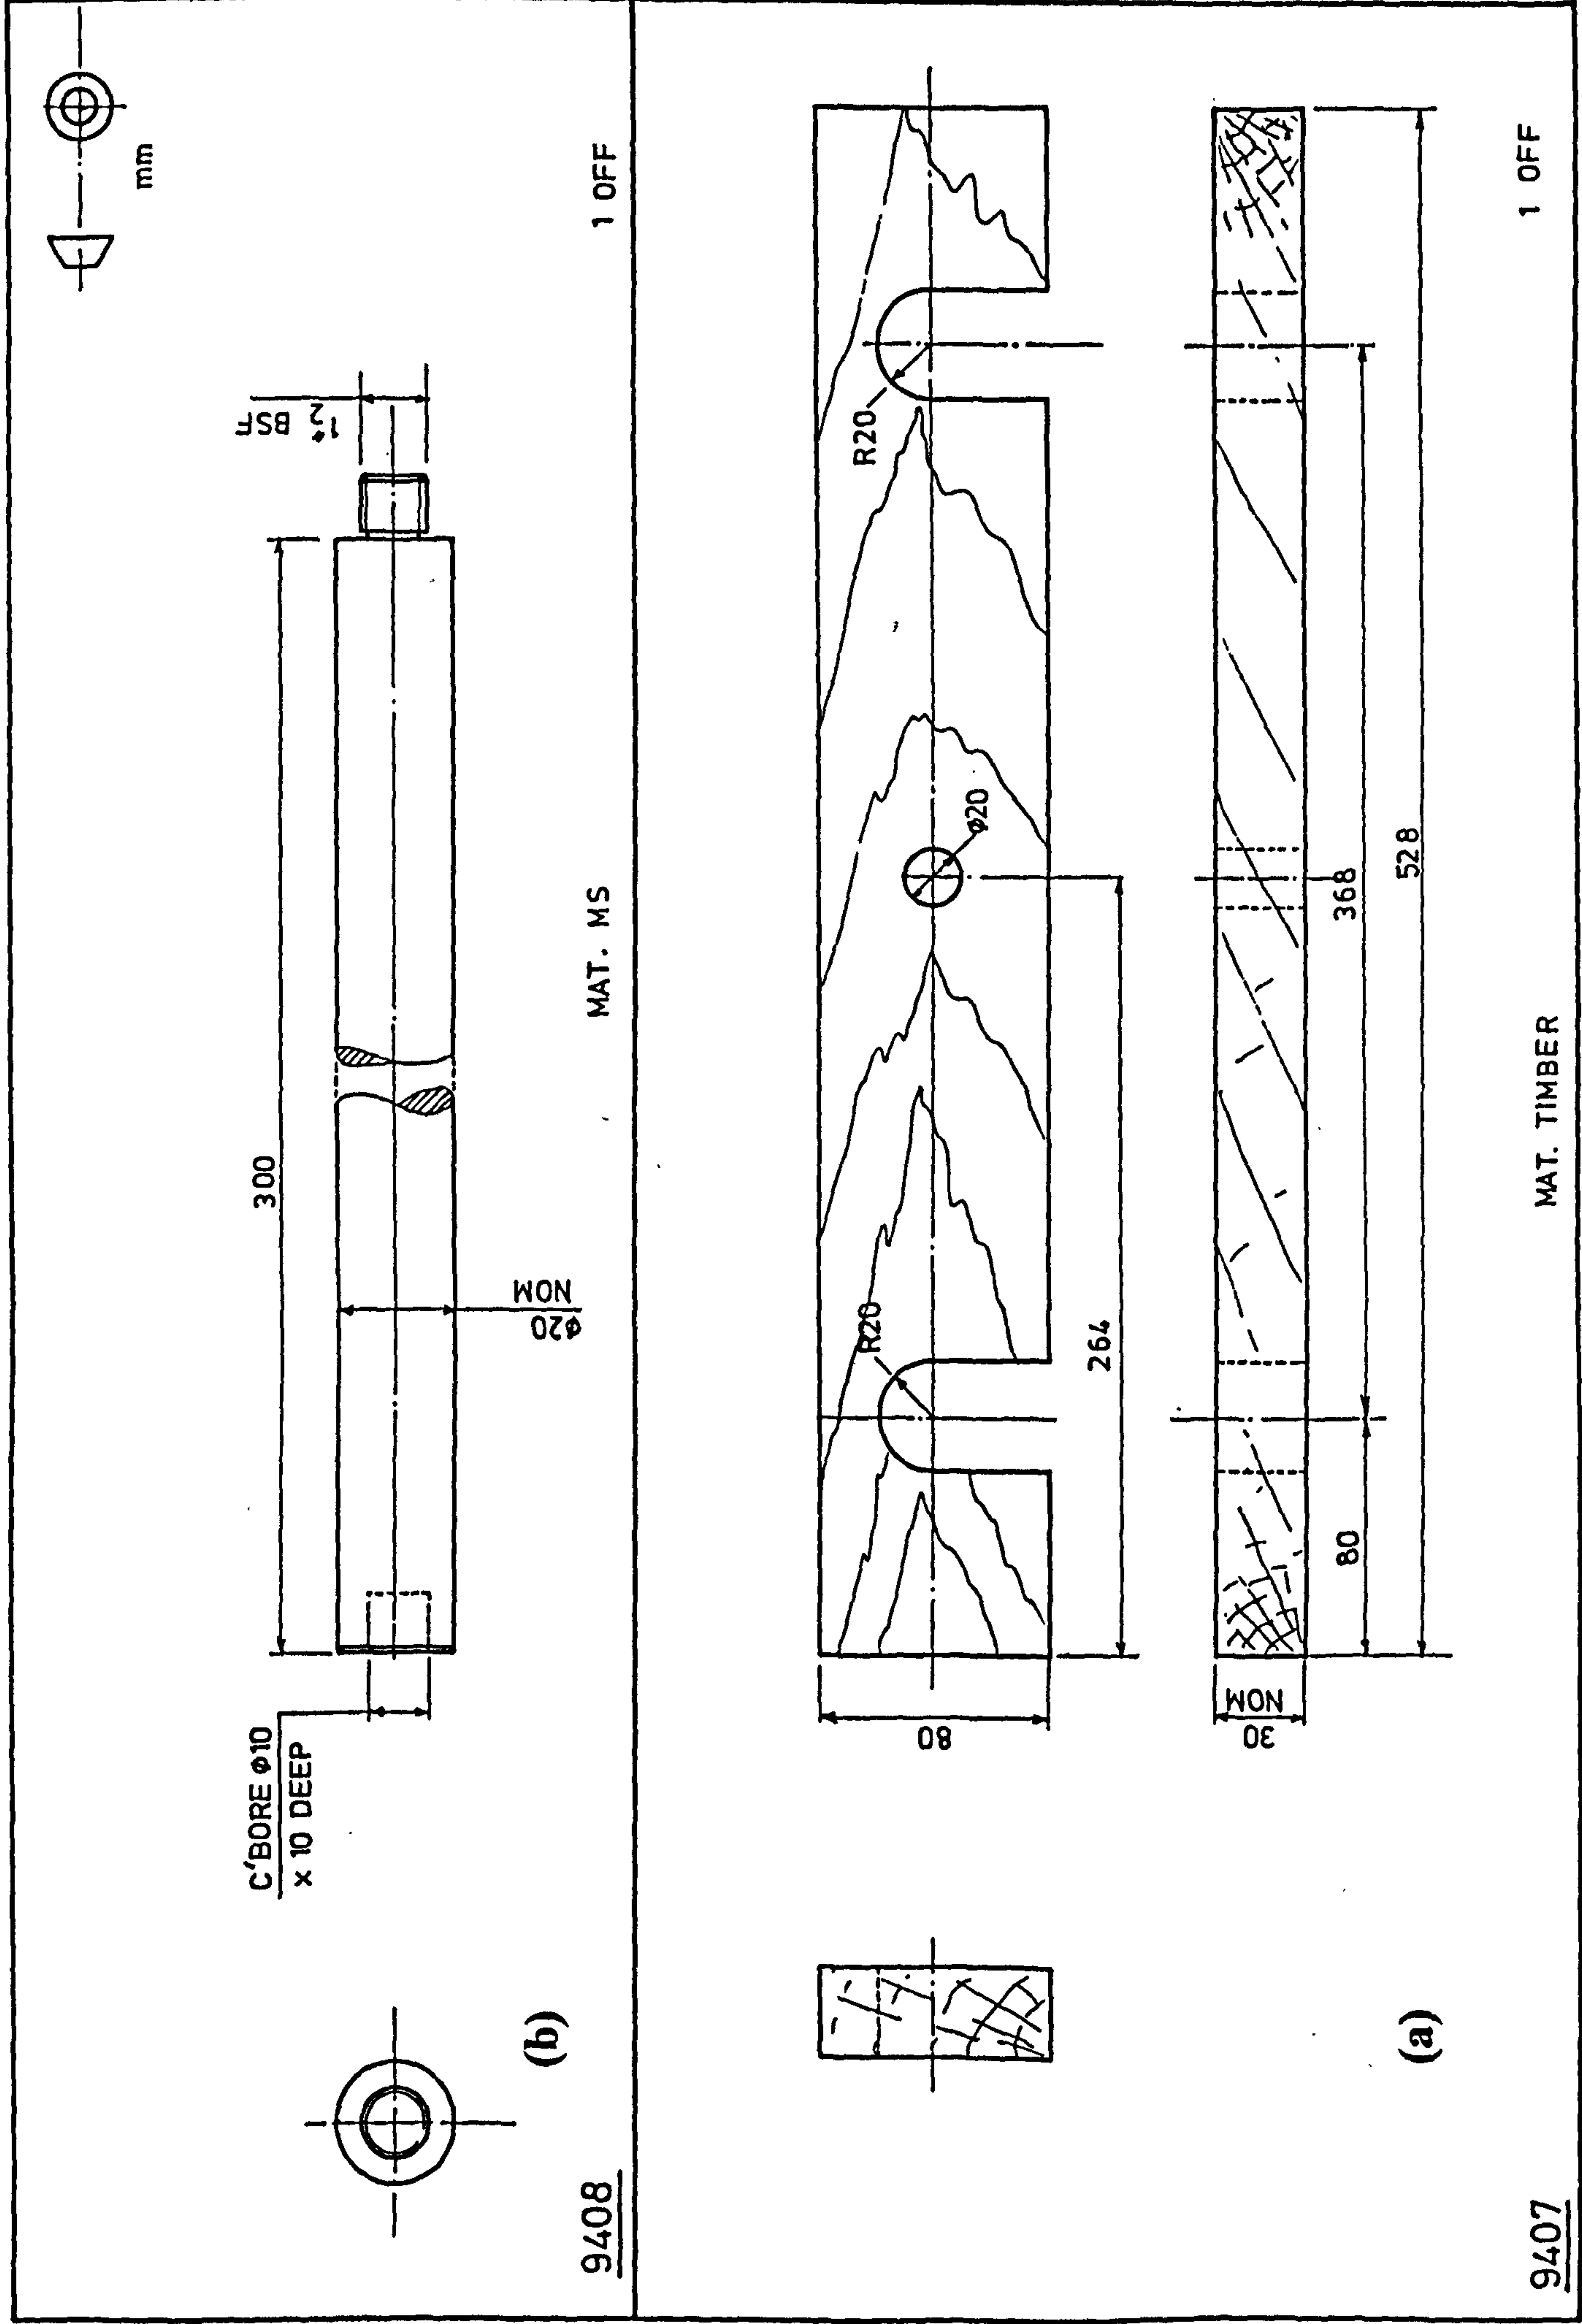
(a) The design details for Wooden frame assembly. (b) The design details for Penetrometer aligner (Push-shaft).
